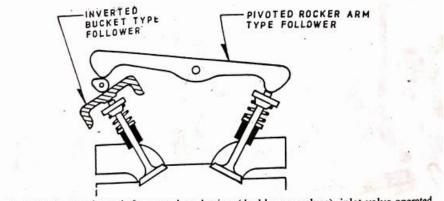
Overhead camshaft-operated mechanism (double row valves), inlet valve operated by inverted bucket type follower and exhaust valve by pivoted rocker arm.
